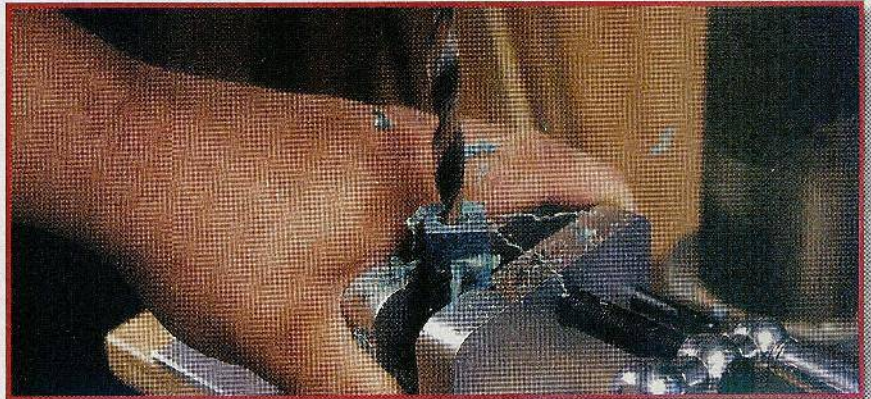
Be sure to use the centering vise so you are able to secure the blank while drilling with a 10mm drill bit.
